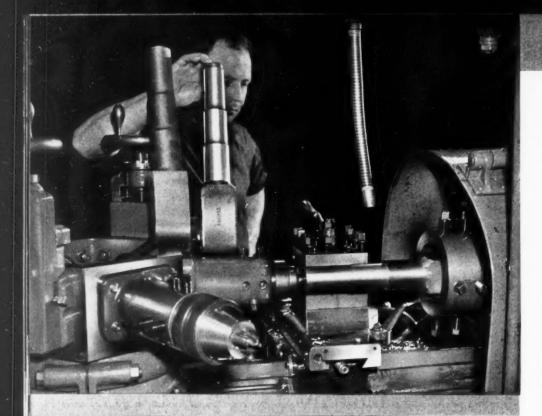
(Left) Rough-turning the Shank End of Wing Terminal Forgings on a Turret Lathe
